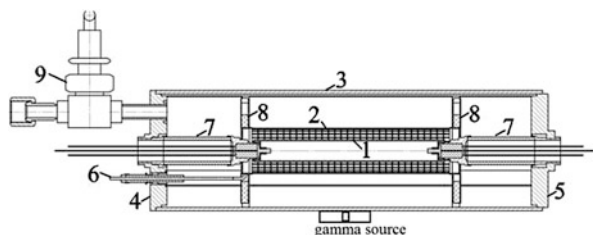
A drawing of the created HPXe detector ionization chamber: 1 – hollow Ti anode; 2 – Frisch grid; 3 – SS cathode (the body); 4, 5 – left and right flanges; 6 – Frisch grid feedthrough; 7 – anode feedthroughs; 8 – ceramic grid supports; 9 – high-pressure vent
